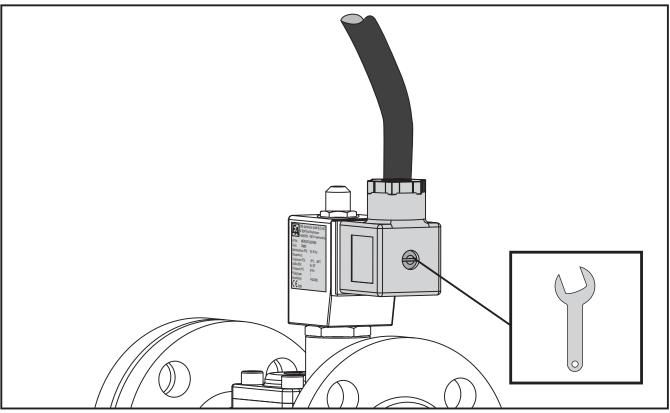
Mounting / Disassembly - Electrical installation
